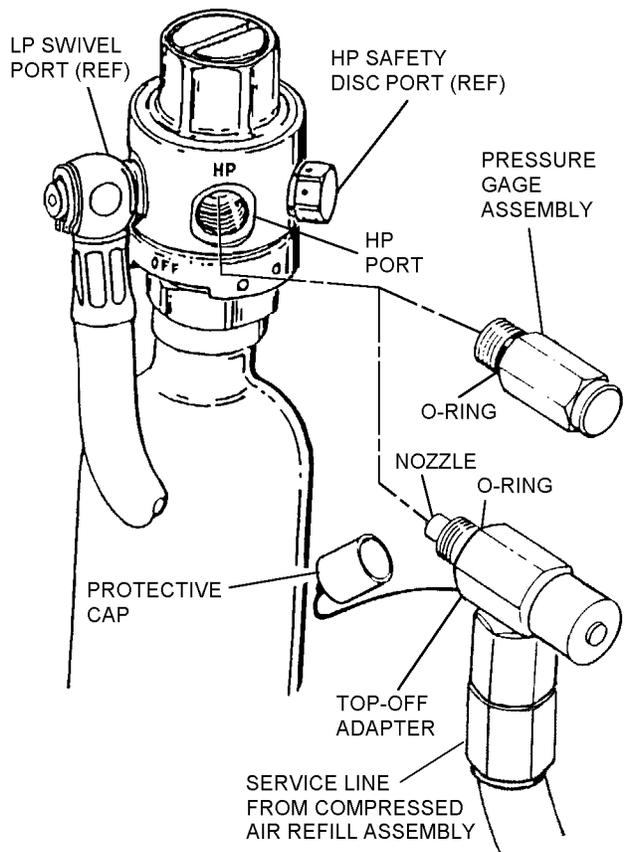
Pressure Gage Removal and Top-Off Adapter Installation
